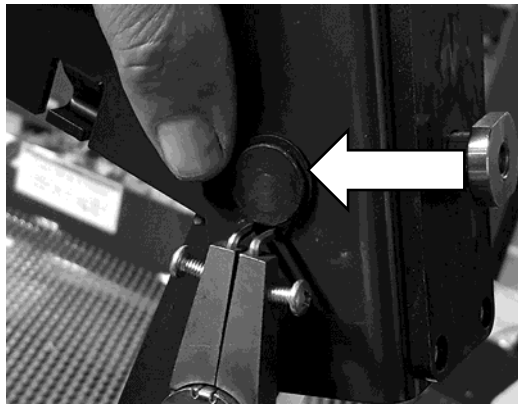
Lower Knuckle Link Arm Snap Ring, Top
